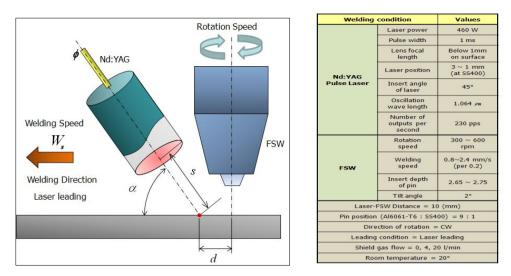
Schematic diagram and welding parameters of LAFSW
